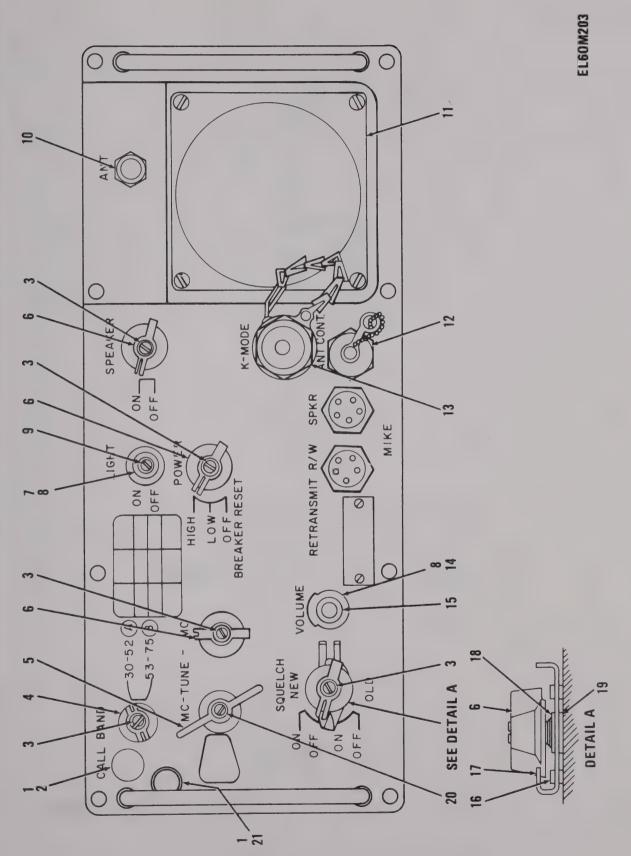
Control Assembly, Front Panel (Sheet 1 of 2).
